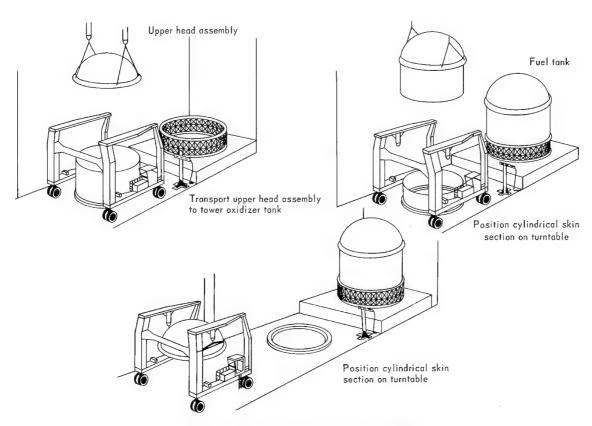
Weld tank assembly for the S-IC vehicle.
